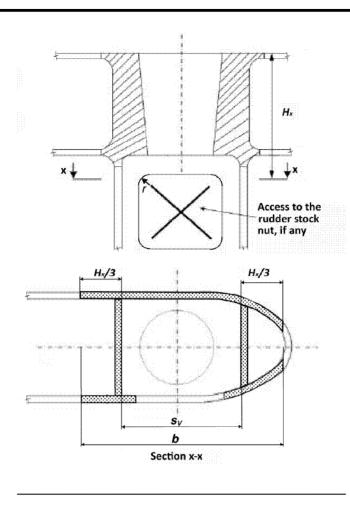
Cross-section of the connection between rudder blade structure and rudder stock housing, example with opening in only one side shown
